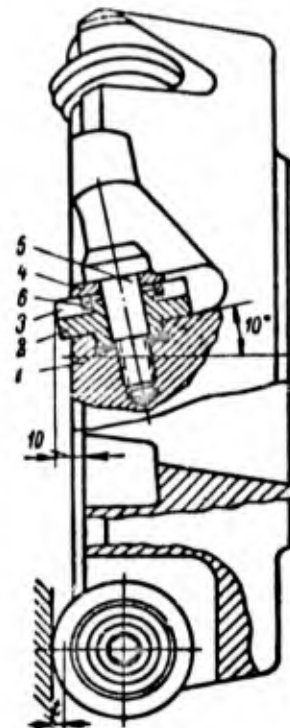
End Mill With Mechanical Fastening of Cemented-Carbidе Disks, Designed by NIAT
